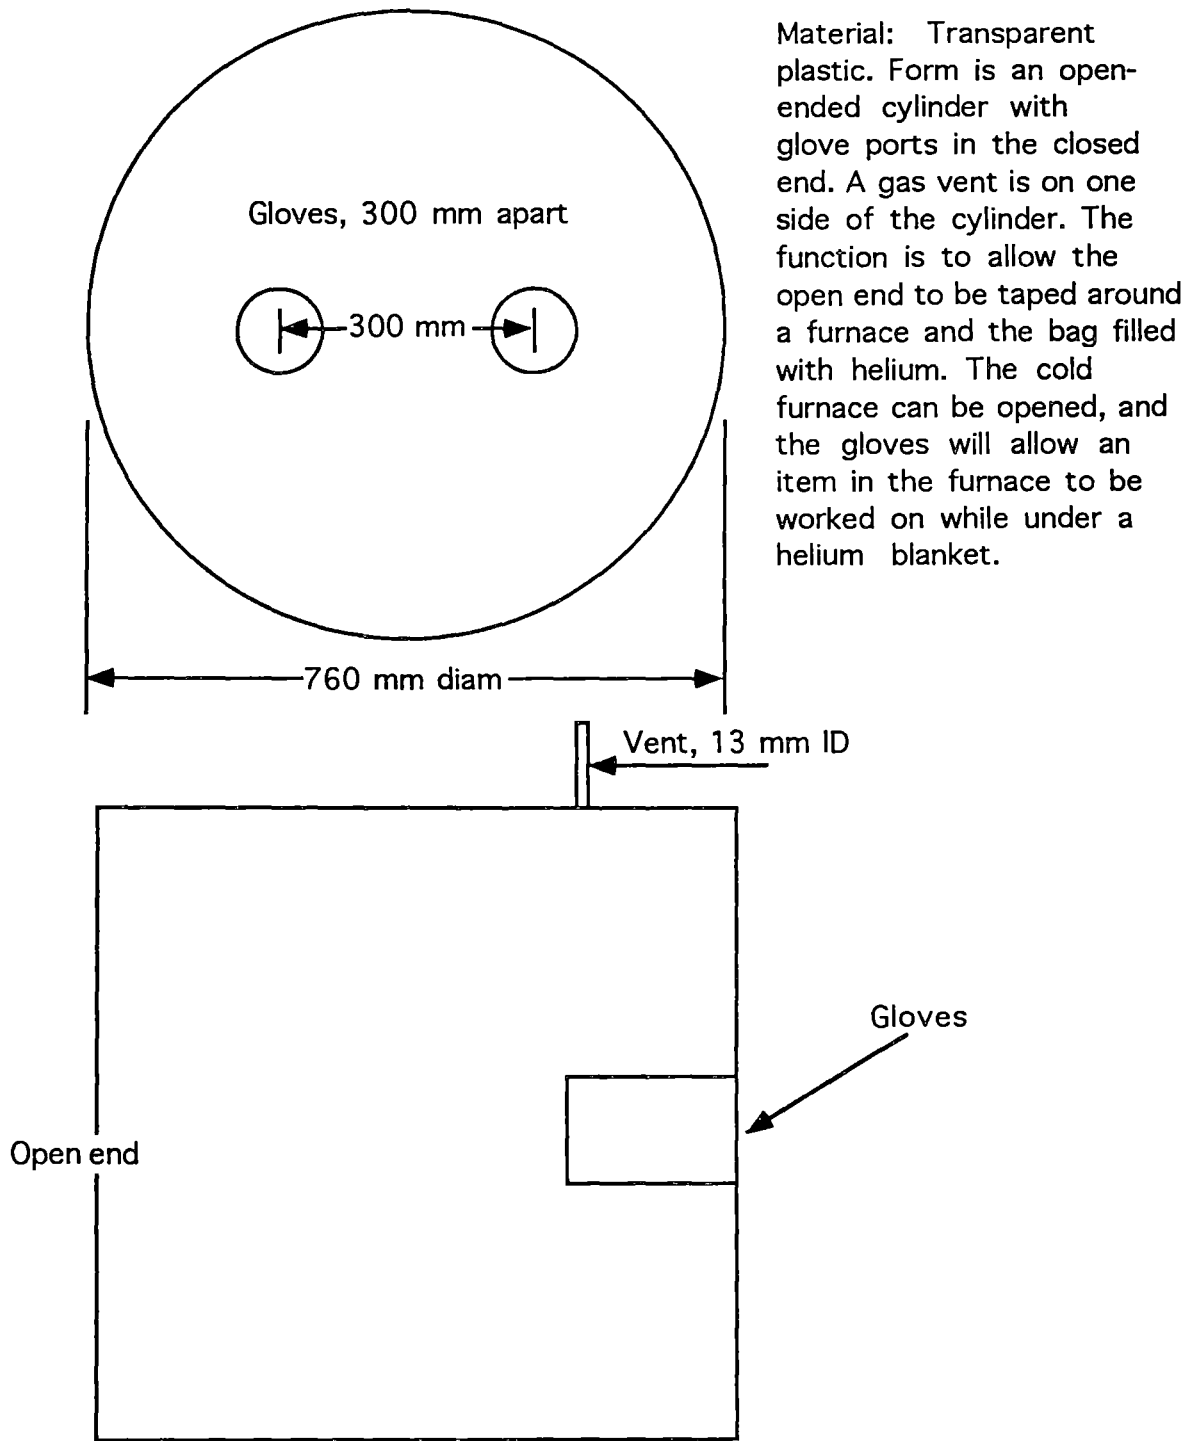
Plastic bag connection to outgas furnace, end view.
